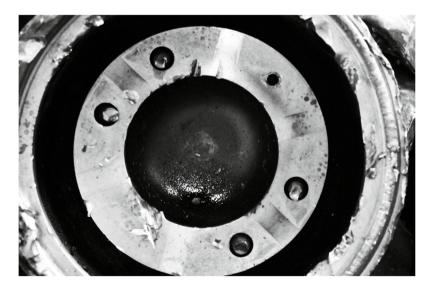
View of the crown of the cylinder where the four fractured crown bolts are observed, the bolt indicated by the arrow shows a fatigue fracture, while the remaining three have an overload fracture.
